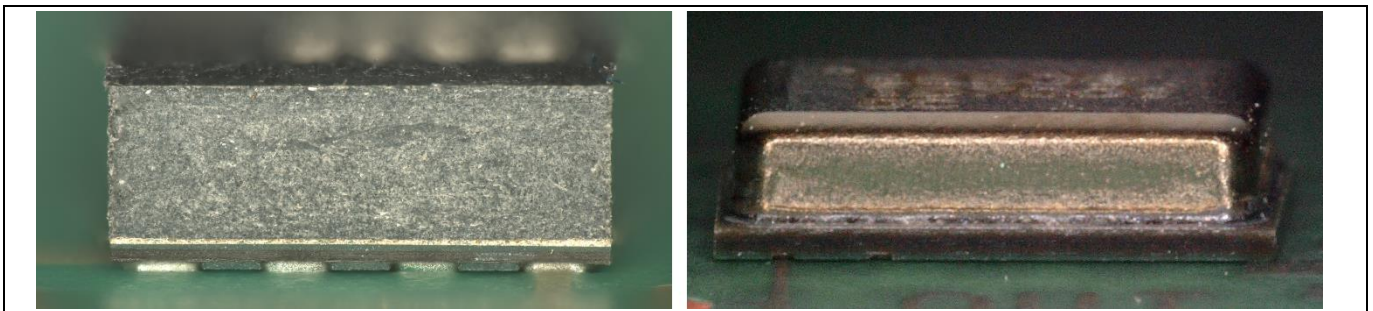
Examples of properly soldered sensor packages inspected by optical microscope.
